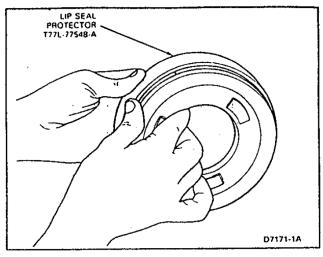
Installing Forward Clutch Piston and Lip Seal
